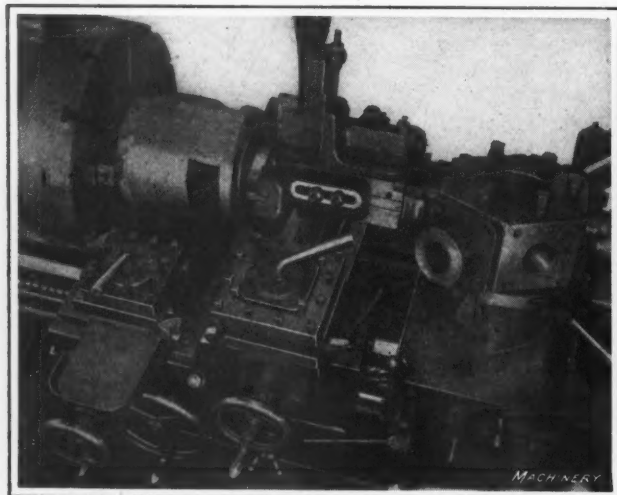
Detail View showing how Motor Frame is held for the First Operation
